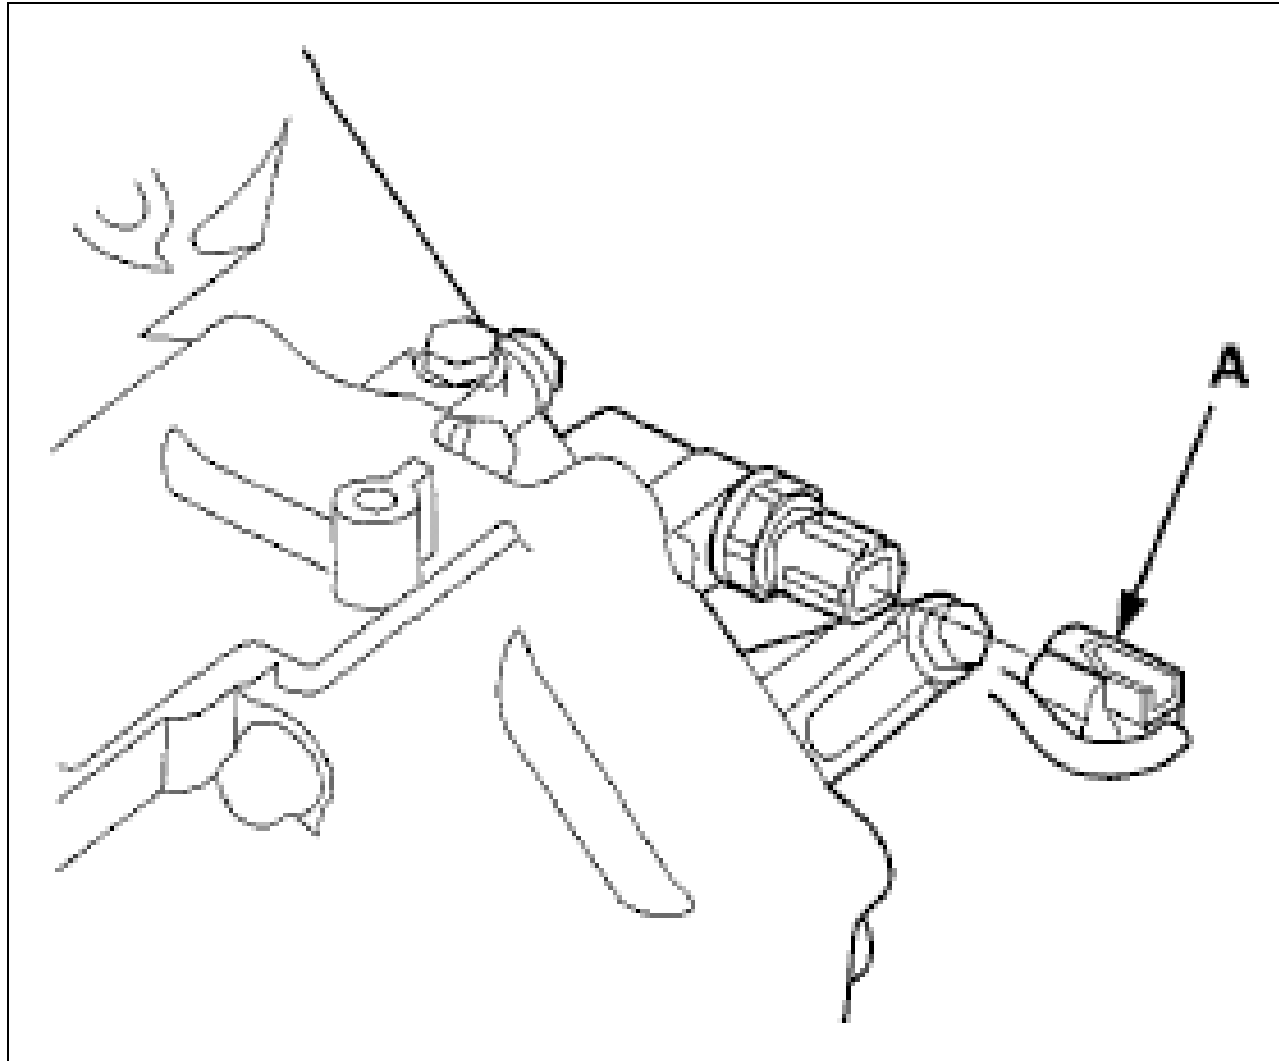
Identifying Input Shaft Speed Sensor Connector And Output Shaft Speed Sensor Connector
